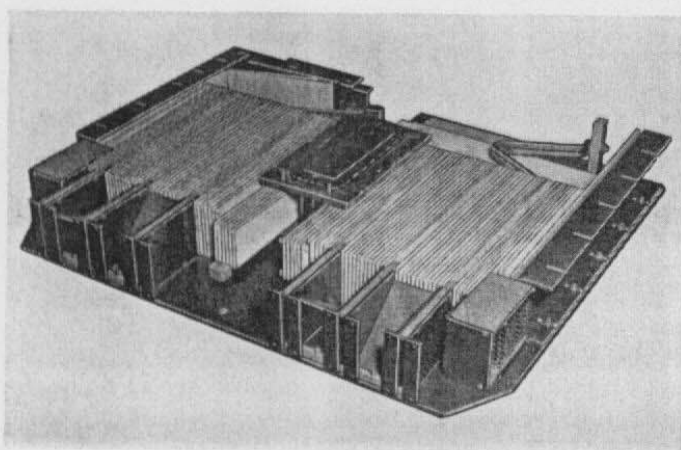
Partially Assembled Arc Chute Viewed from Top
